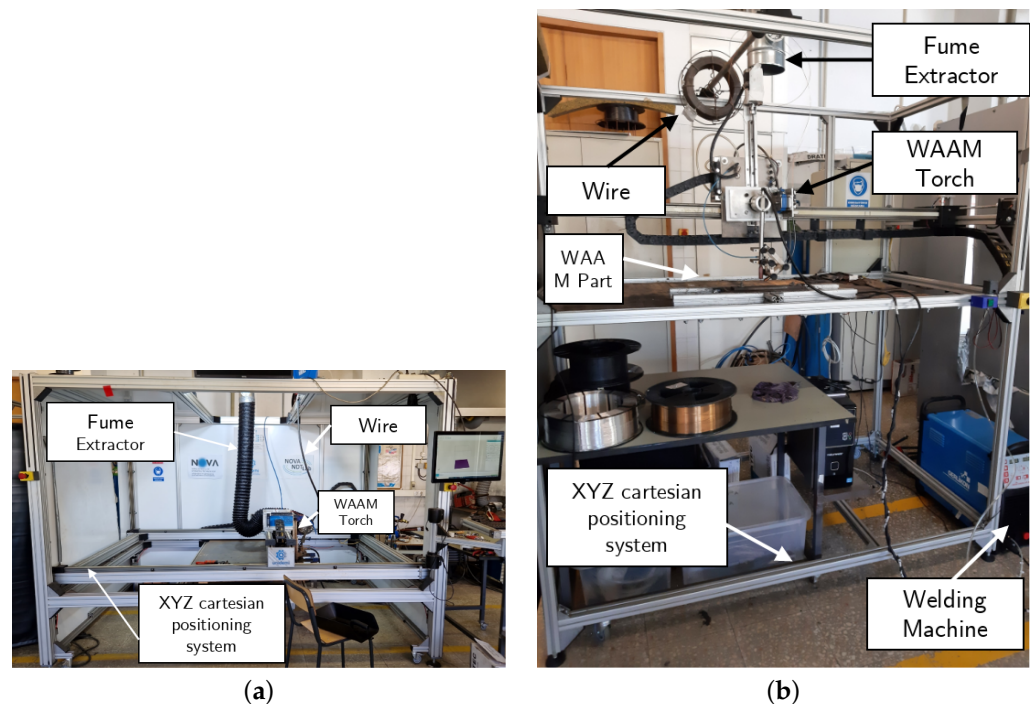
Experimental setups for Wire and Arc Additive Manufacturing using (a) Gas Metal Arc Welding and (b) Gas Tungsten Arc Welding.
